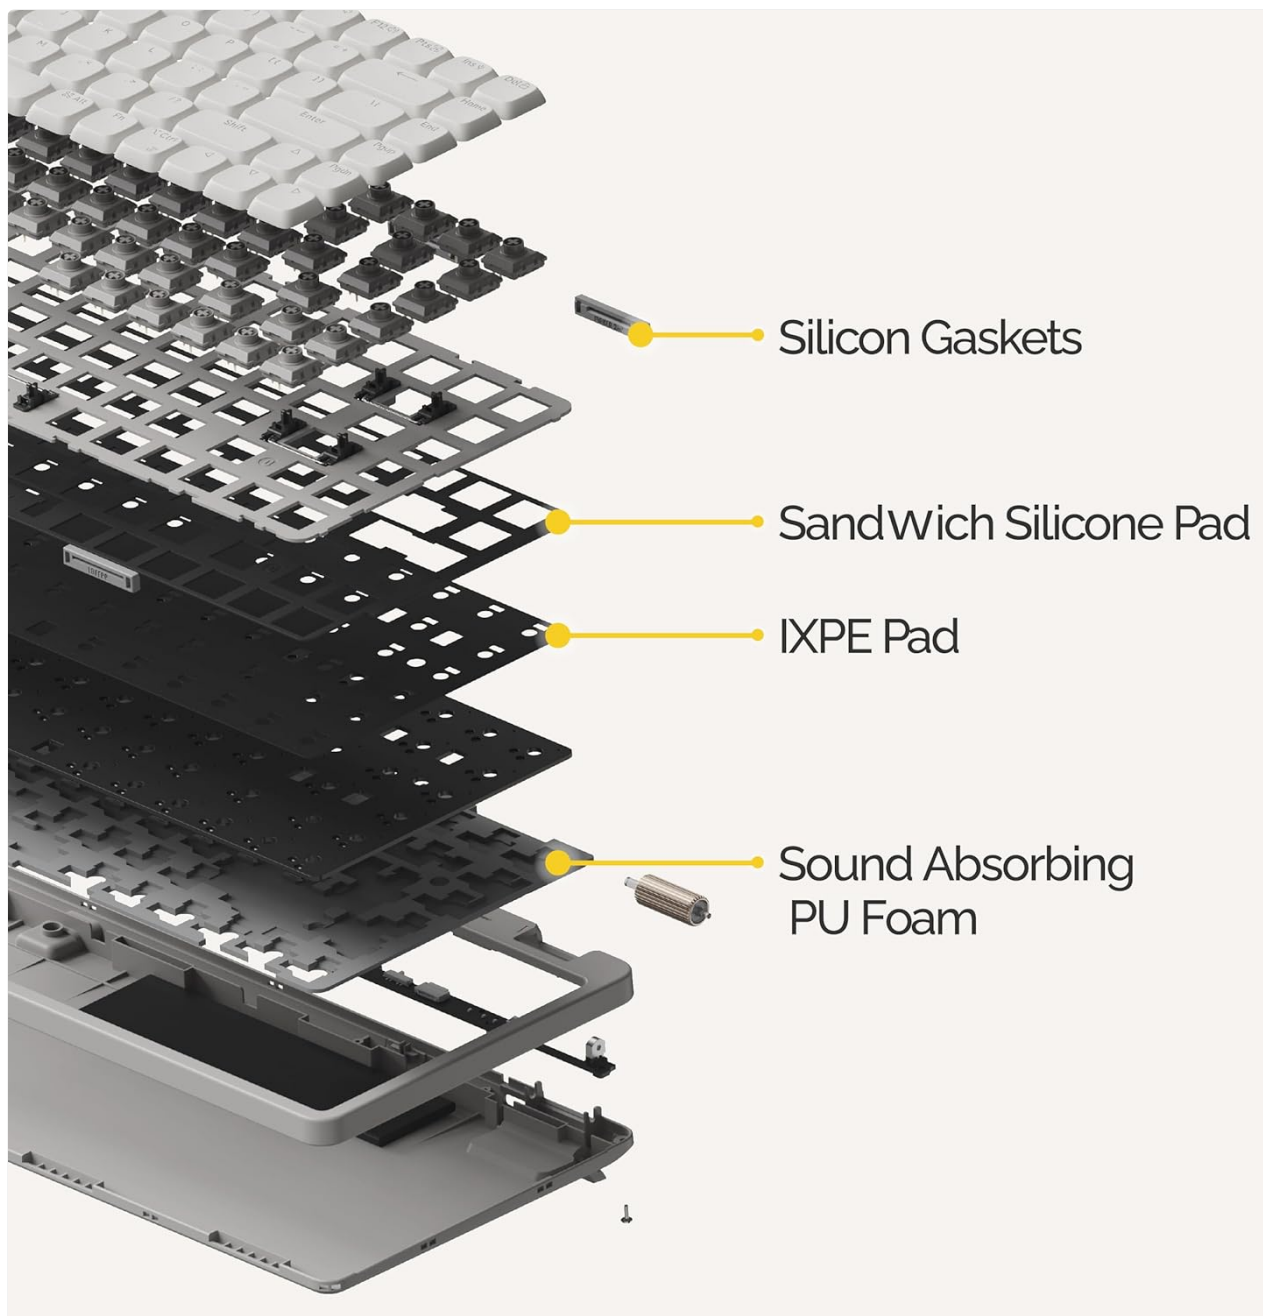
Exploded view illustrating the multi-layered gasket design for enhanced typing feel and sound.
